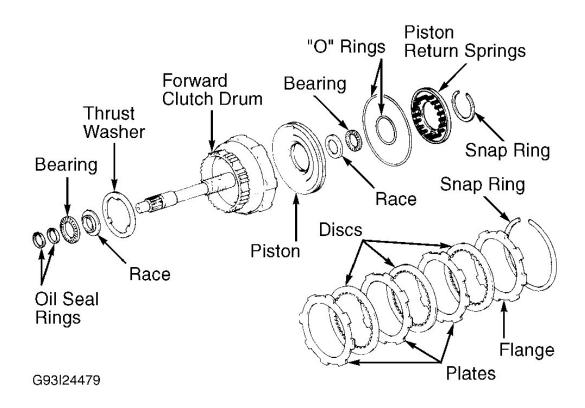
Exploded View Of Forward Clutch Assembly Courtesy of TOYOTA MOTOR SALES, U.S.A. INC.
